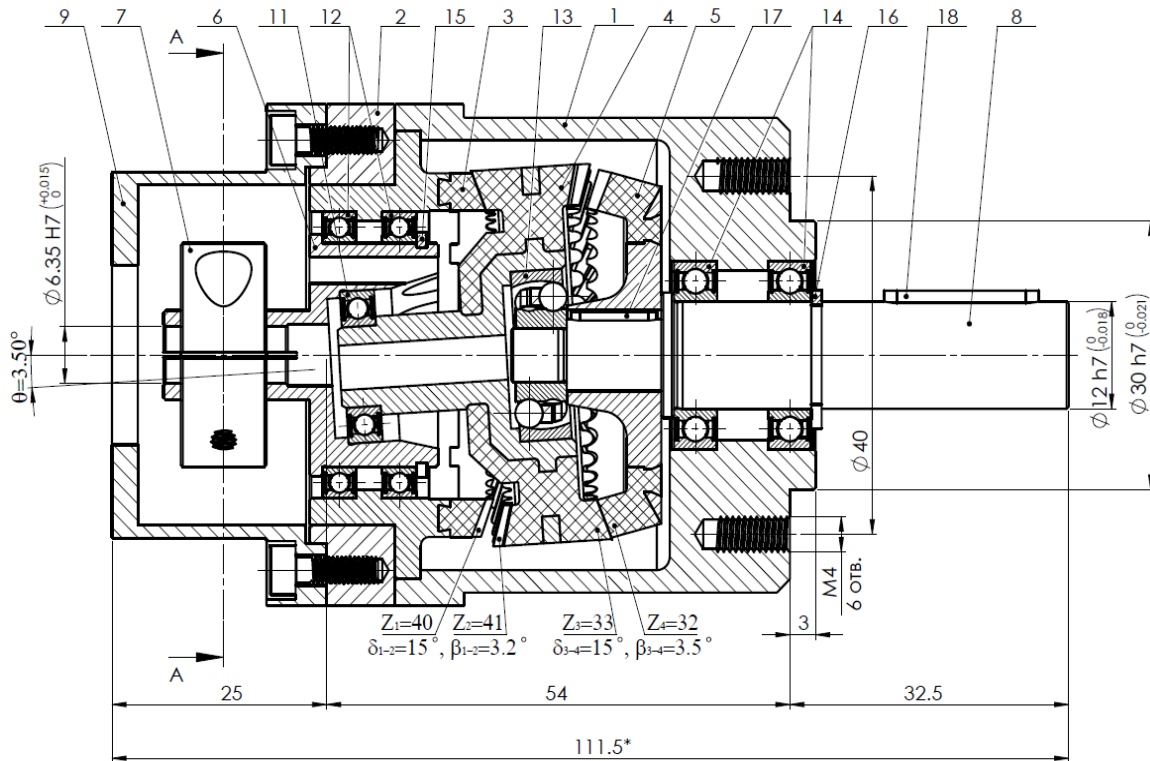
A precessional gear reducer with a tooth-to-tooth engagement type A^D_{cx-cv}
